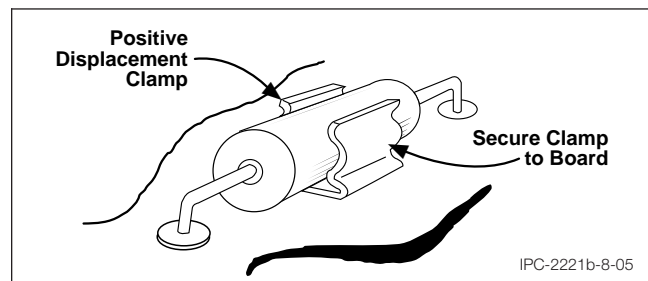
Clamp-Mounted Axial-Leaded Component
